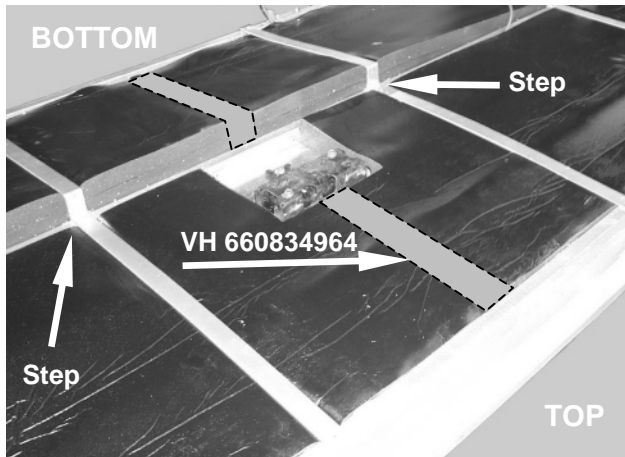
Installation of the stepped strips in the center part of the door. Note tank tape VH 660834964 joining the insulation panels
